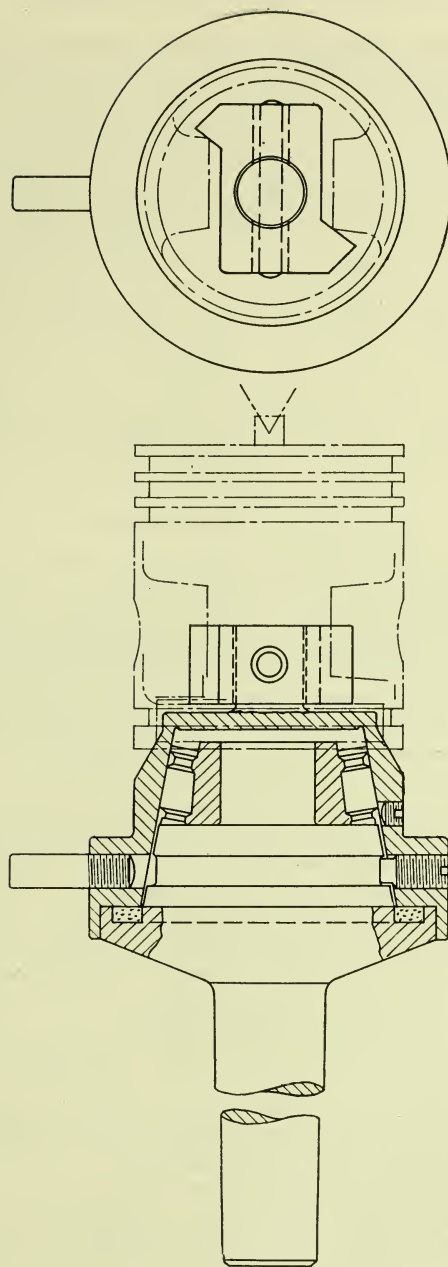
A NEWER FORM OF CENTER IN WHICH THE THRUST AND THE DRIVING LOAD ARE TAKEN BY A TAPER ROLLER BEARING
